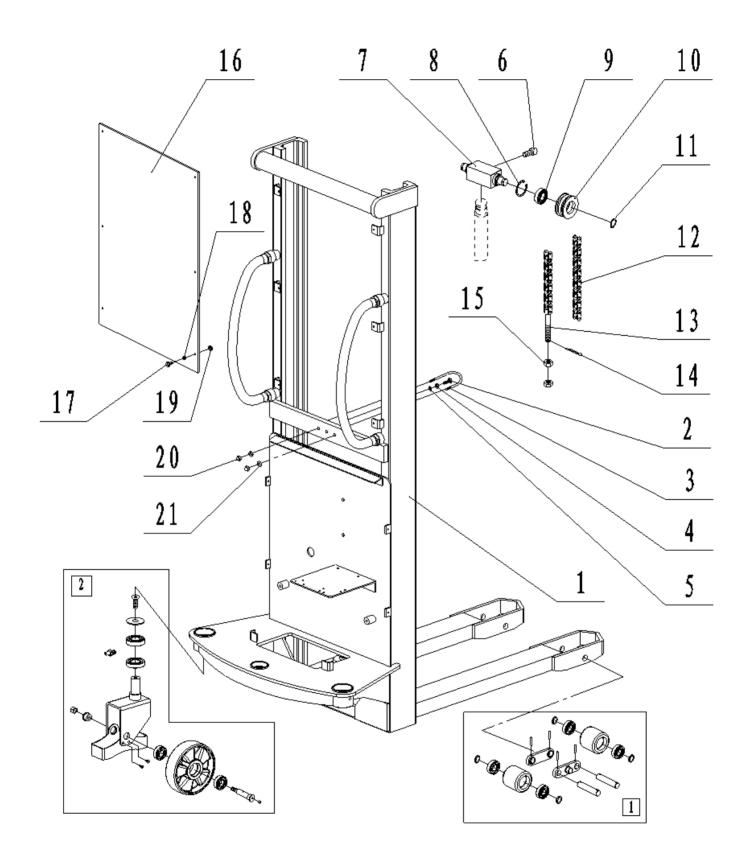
Spare parts list for fixed mast (single mast 1600 mm)/ Lista ricambi per montante fisso (simplex 1600 mm)
